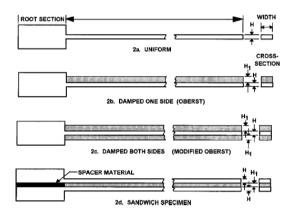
Test Specimen of ASTM E756-05 Testing
